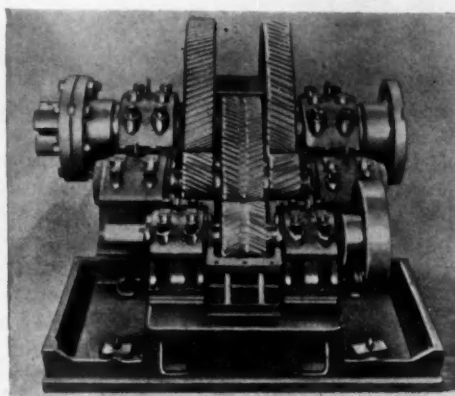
HERRINGBONE-GEAR DOUBLE-REDUCTION UNIT
